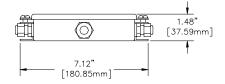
Summing Stainless Steel Junction Box Mounting
